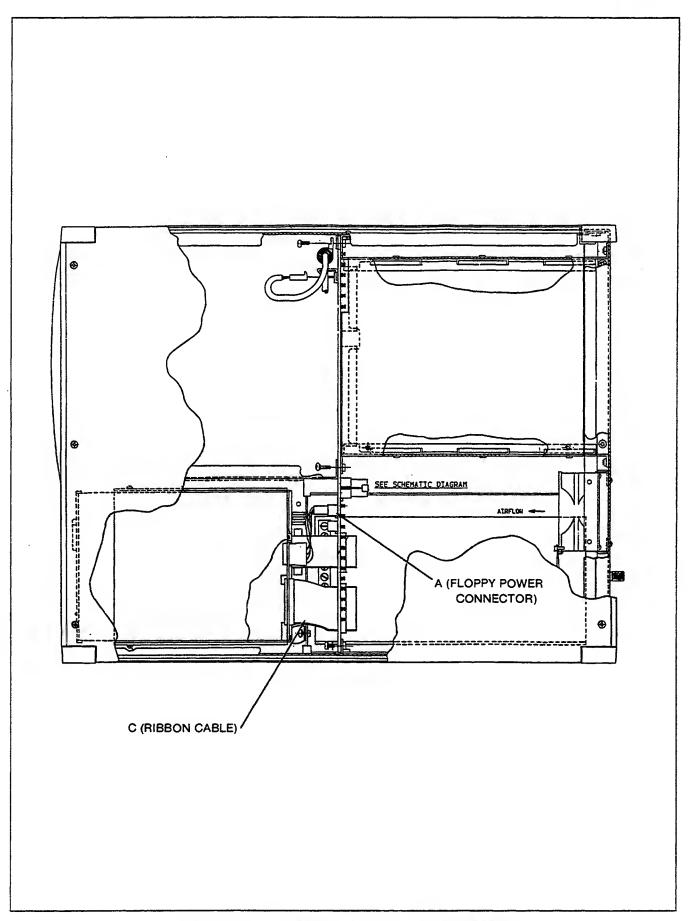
Top View of 1722A/1752A (New Chassis)
